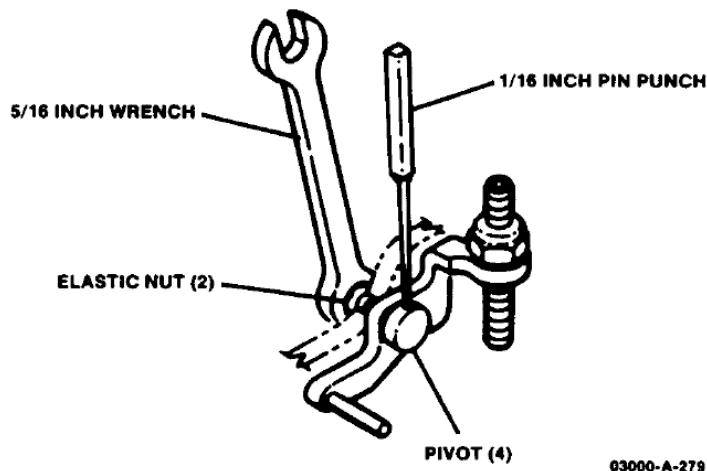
Holding Pivot (4) to Remove Elastic Nut (2)
